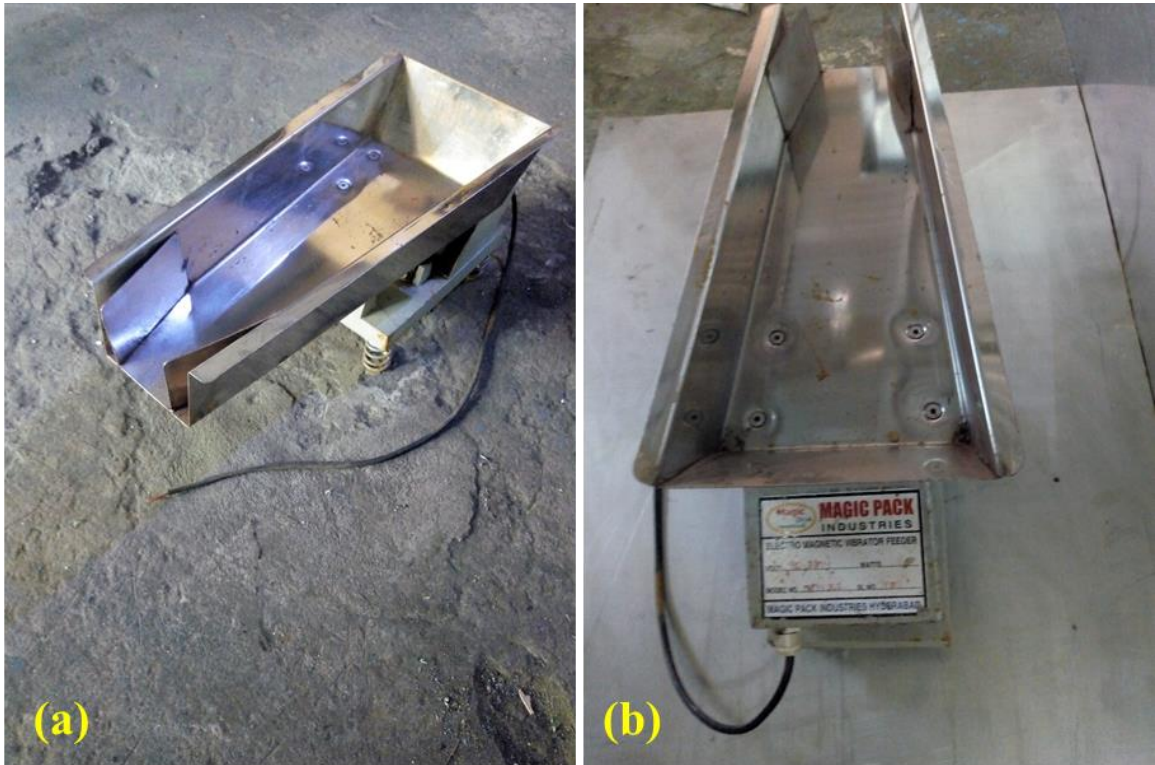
Vibratory feeder (a) Isometric view (b) Front view.
